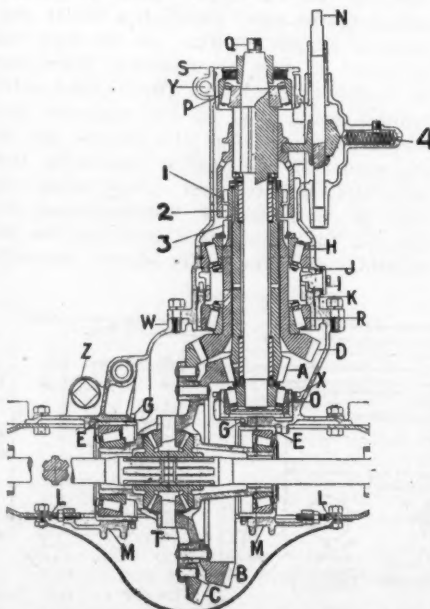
Sectional view of 1914 Cadillac two speed axle
